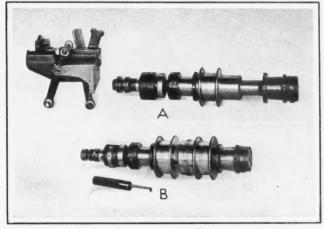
(A) High-speed Non-reversing Spindle and Feed-slide Bracket;
